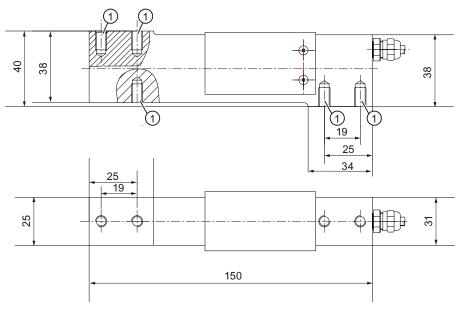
SIWAREX WL260 SP-S SA dimension drawing
